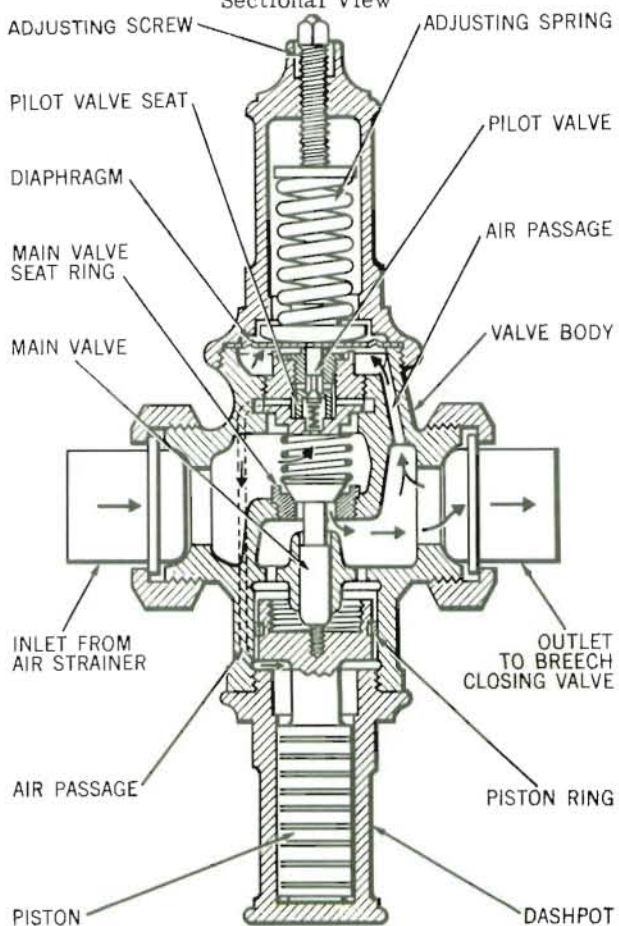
Breech Mechanism Air Reduction Valve, Mason Type, Sectional View
